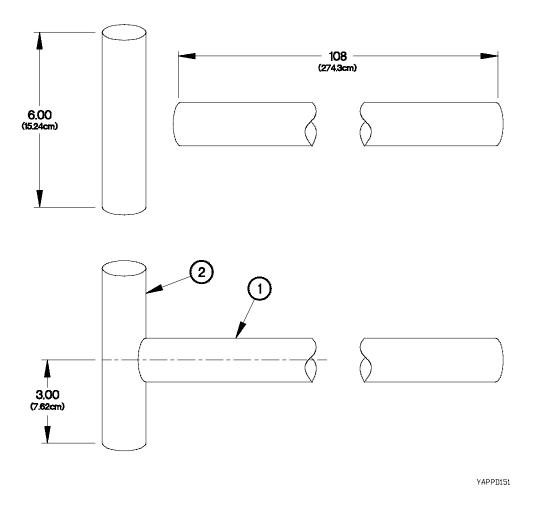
Dump Body Cab Protector Pivot Pin Removal Tool Assembly
